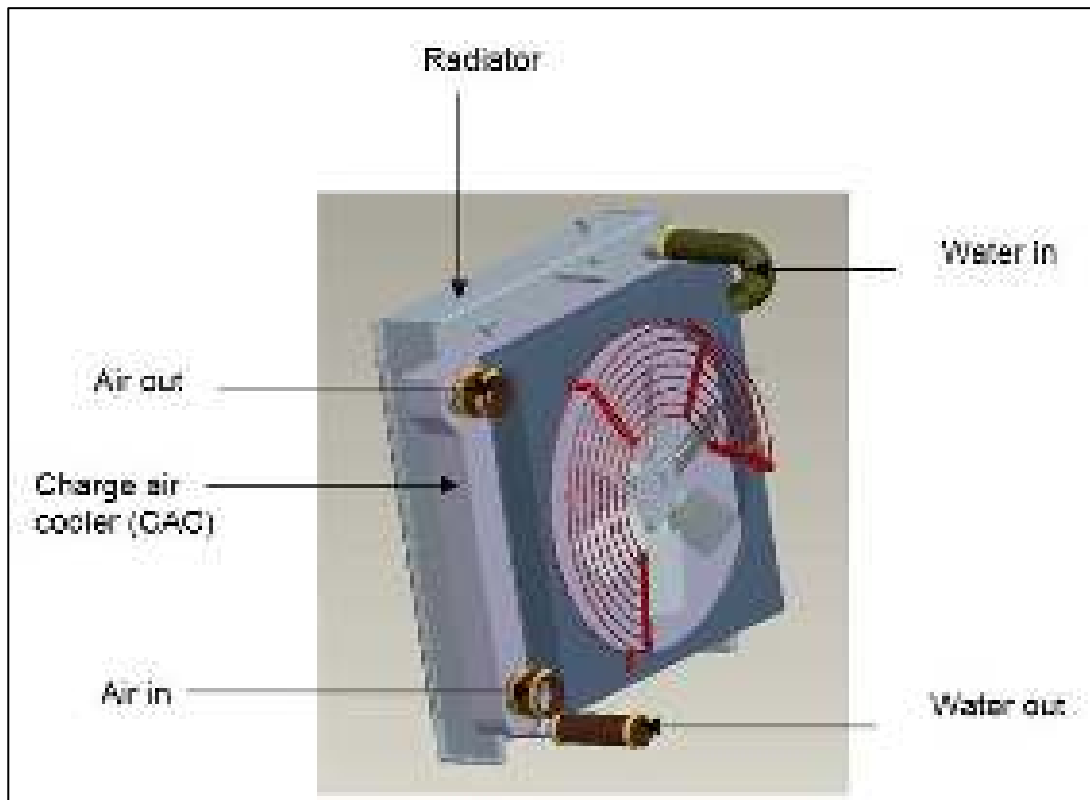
Computer Model of Radiator Charging Air Cooler Arrangement
